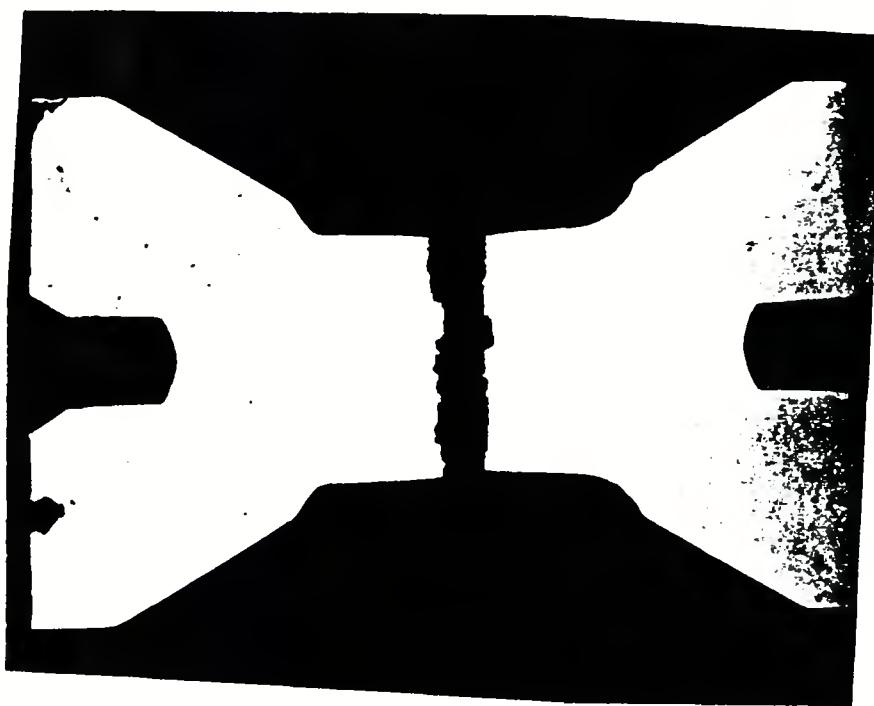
Cross-section of nickel plated 7075 aluminum conical head tensile specimen after testing (magnified 6X). Failure occurred in the aluminum at 83,000 psi (573 MPa).
